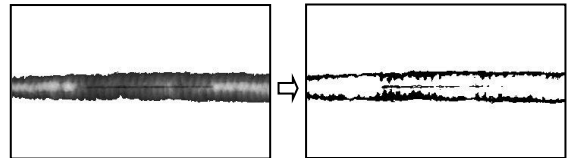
Separation of welding defect from welding area by conventional threshold algorithm
